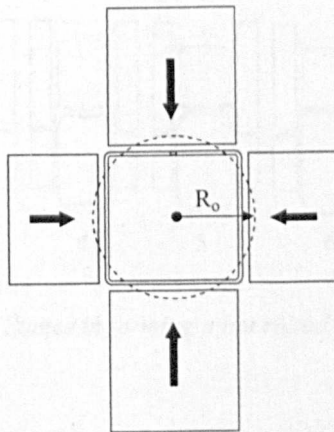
Turks head crushing the circular tube into a box section (Stage 4)
